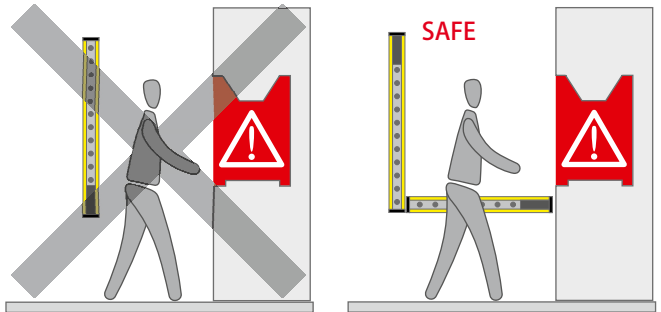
L-SHAPED INSTALLATION OF THE LIGHT CURTAIN
